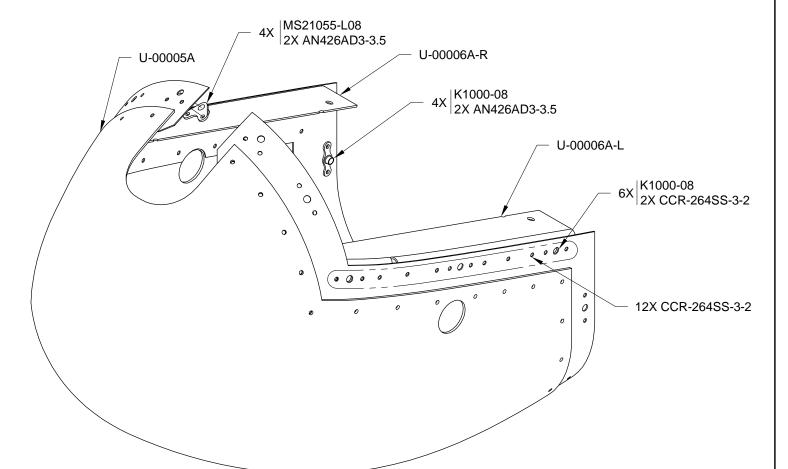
RIVETING WHEEL FAIRING BRACKETS AND NUTPLATES TO THE WHEEL FAIRING FRONT
